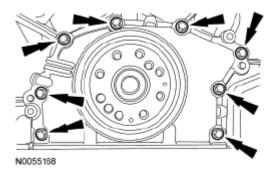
Locating Oil Pump Bolts Courtesy of FORD MOTOR CO.
